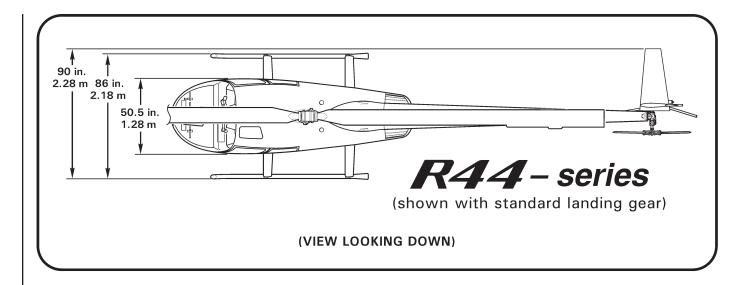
EXTERNAL DIMENSIONS (C004-2 empennage installed)
